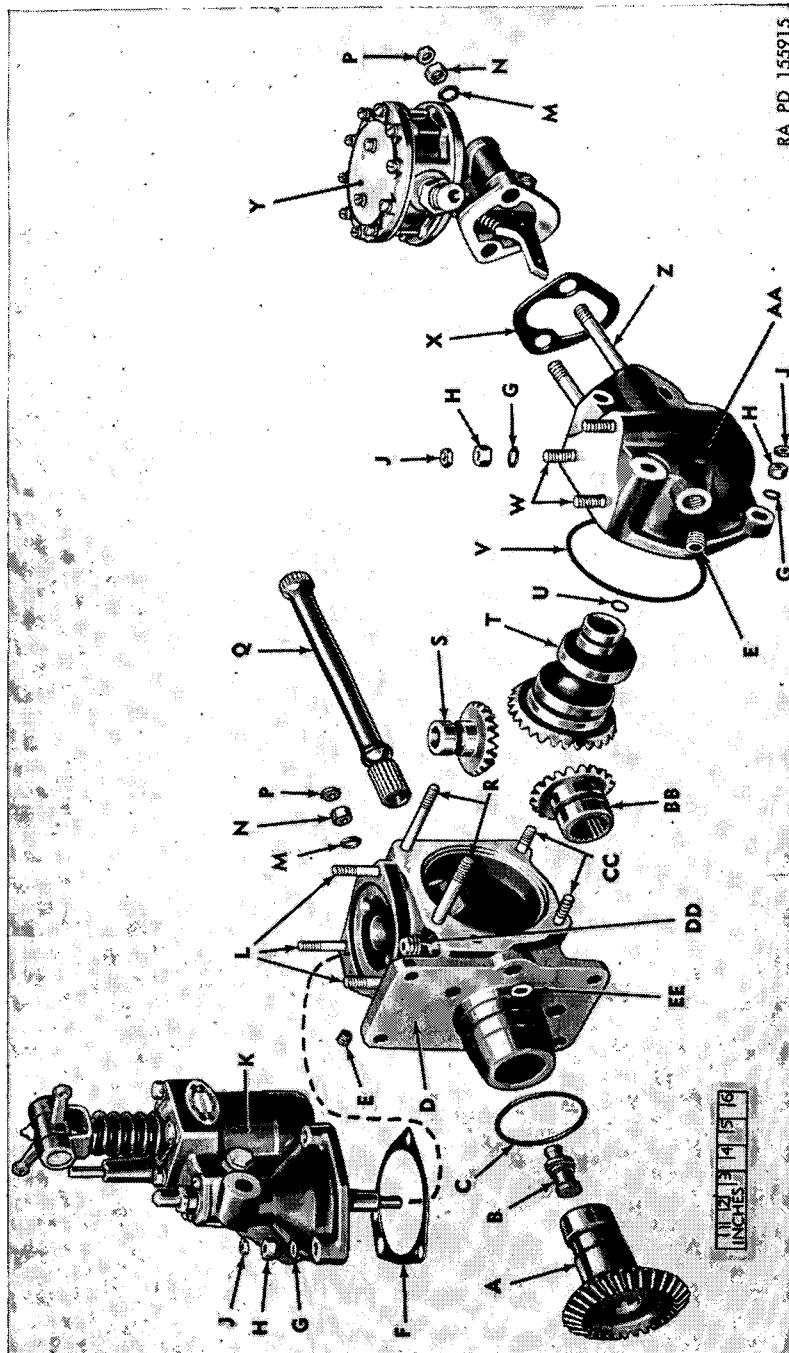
Camshaft drive housing—governor and fuel pump drive—exploded view.
